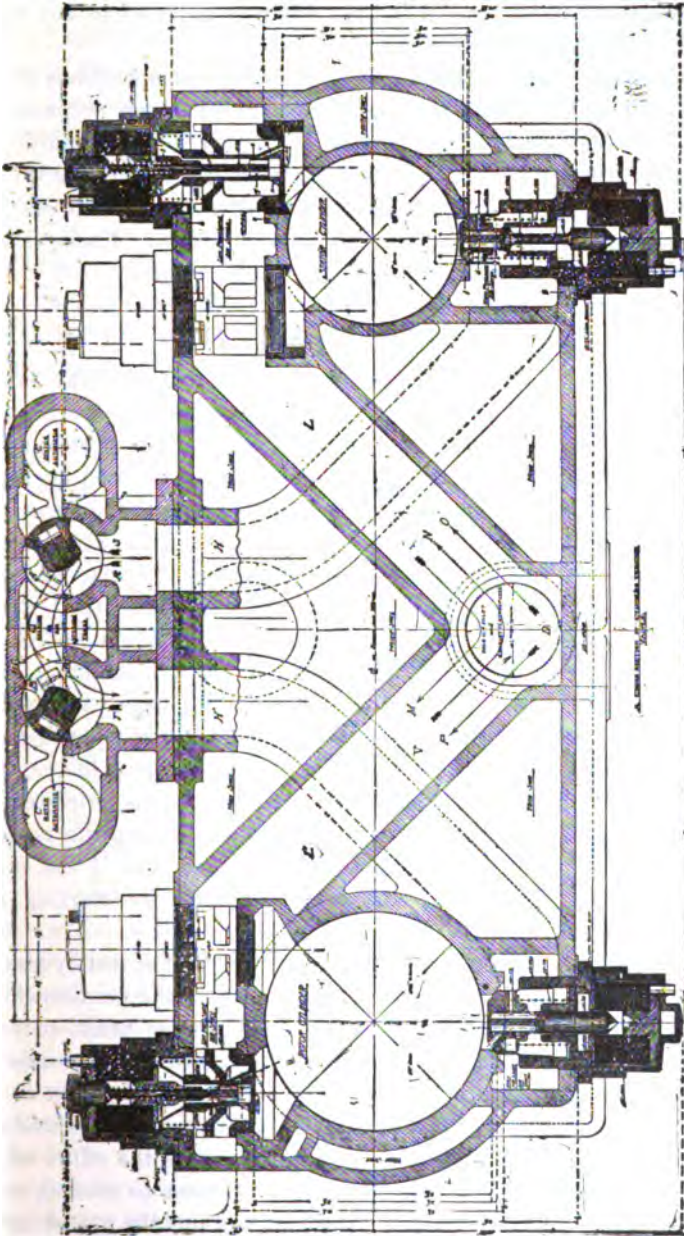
TRANSVERSE SECTION THROUGH CYLINDERS AND VALVES OF LOCOMOTIVES 2 AND 3.
